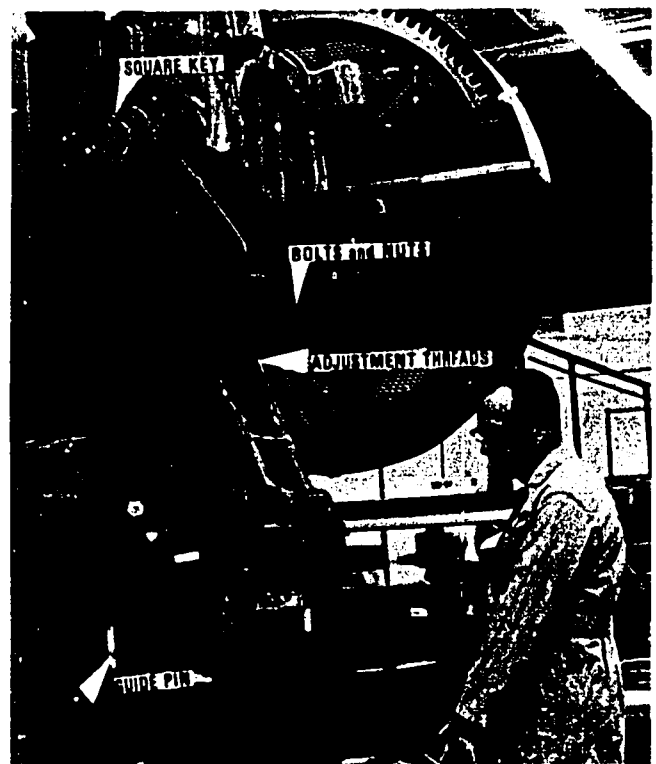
Many of the parts of this press are assembled with mechanical fasteners. How many examples can you find in the picture?
